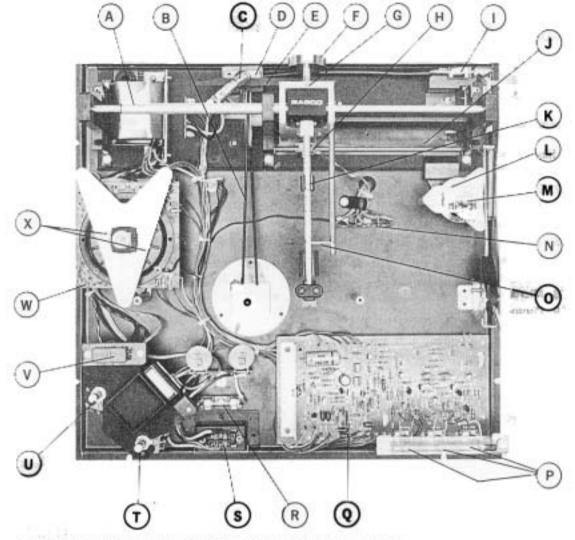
TOP VIEW WITH STAGES 1 THRU 4 OF DISASSEMBLY
